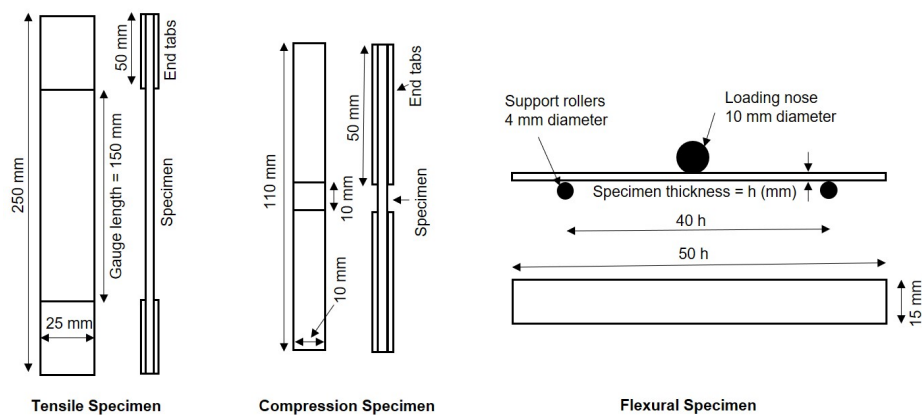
Specimen dimensions for test samples in tensile, compression and flexural tests.
